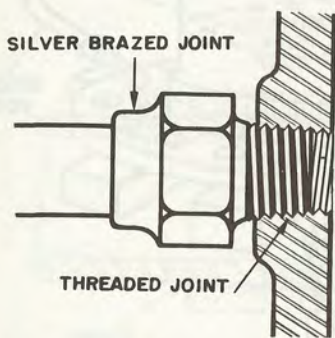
Always make up the silver-brazed joint first, as heat will damage pipe-thread compound. See that necessary unions are provided for disassembly and servicing.
